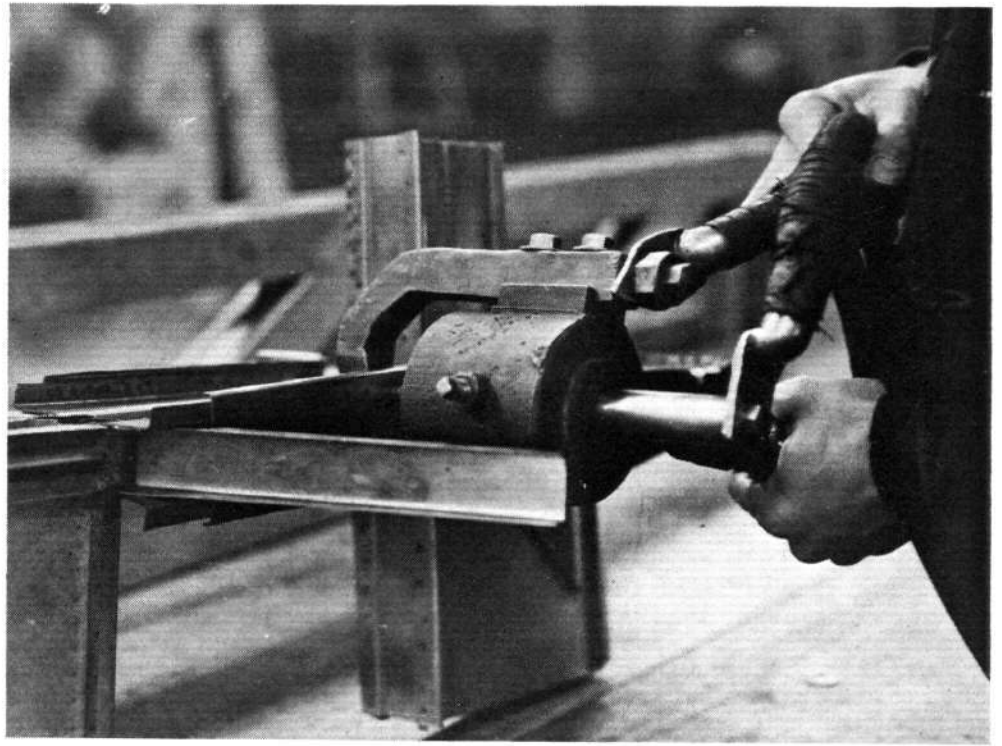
, PNEUMATICALLY CONTROLLED WELDING TOOL : The pressure on the electrodes is automatically determined, and is independent of the skill of the operator.
